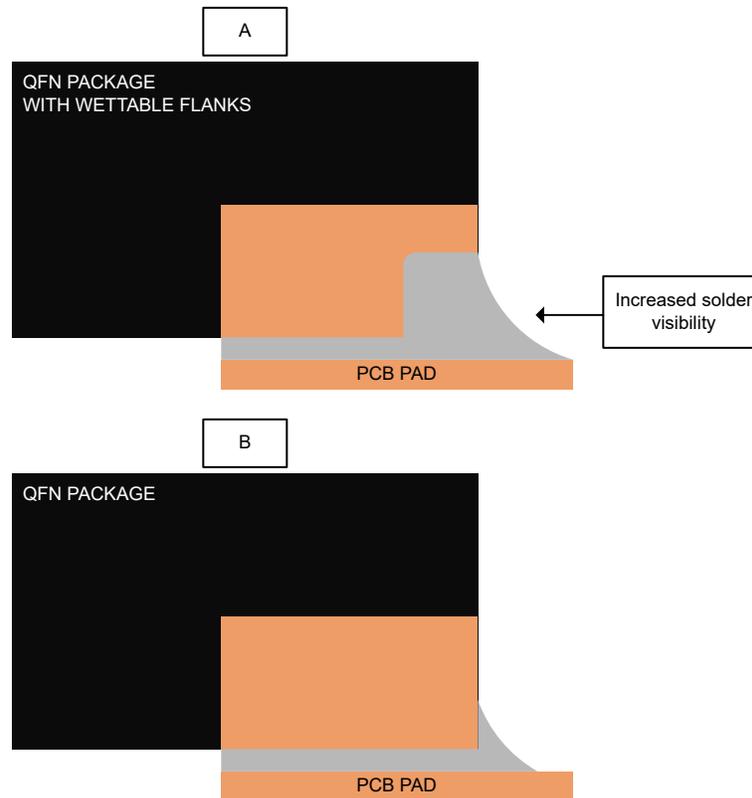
QFN Package Cross-Sectional View with (A) and Without (B) Wettable Flanks
